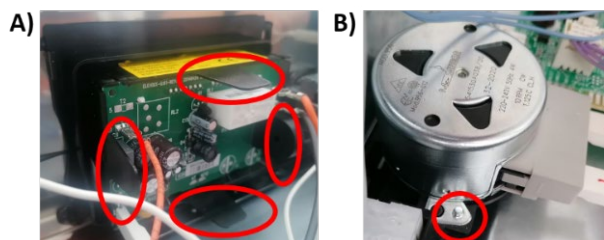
Example of criticalities. A) PCB user interface hosting case and B) door lock motor assembly
